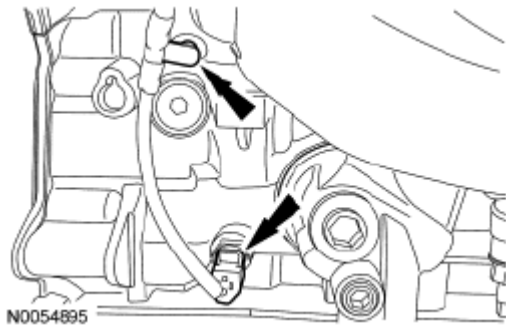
Locating Engine Oil Pressure (EOP) Switch Electrical Connector & Wiring Harness Pin-Type Retainer
